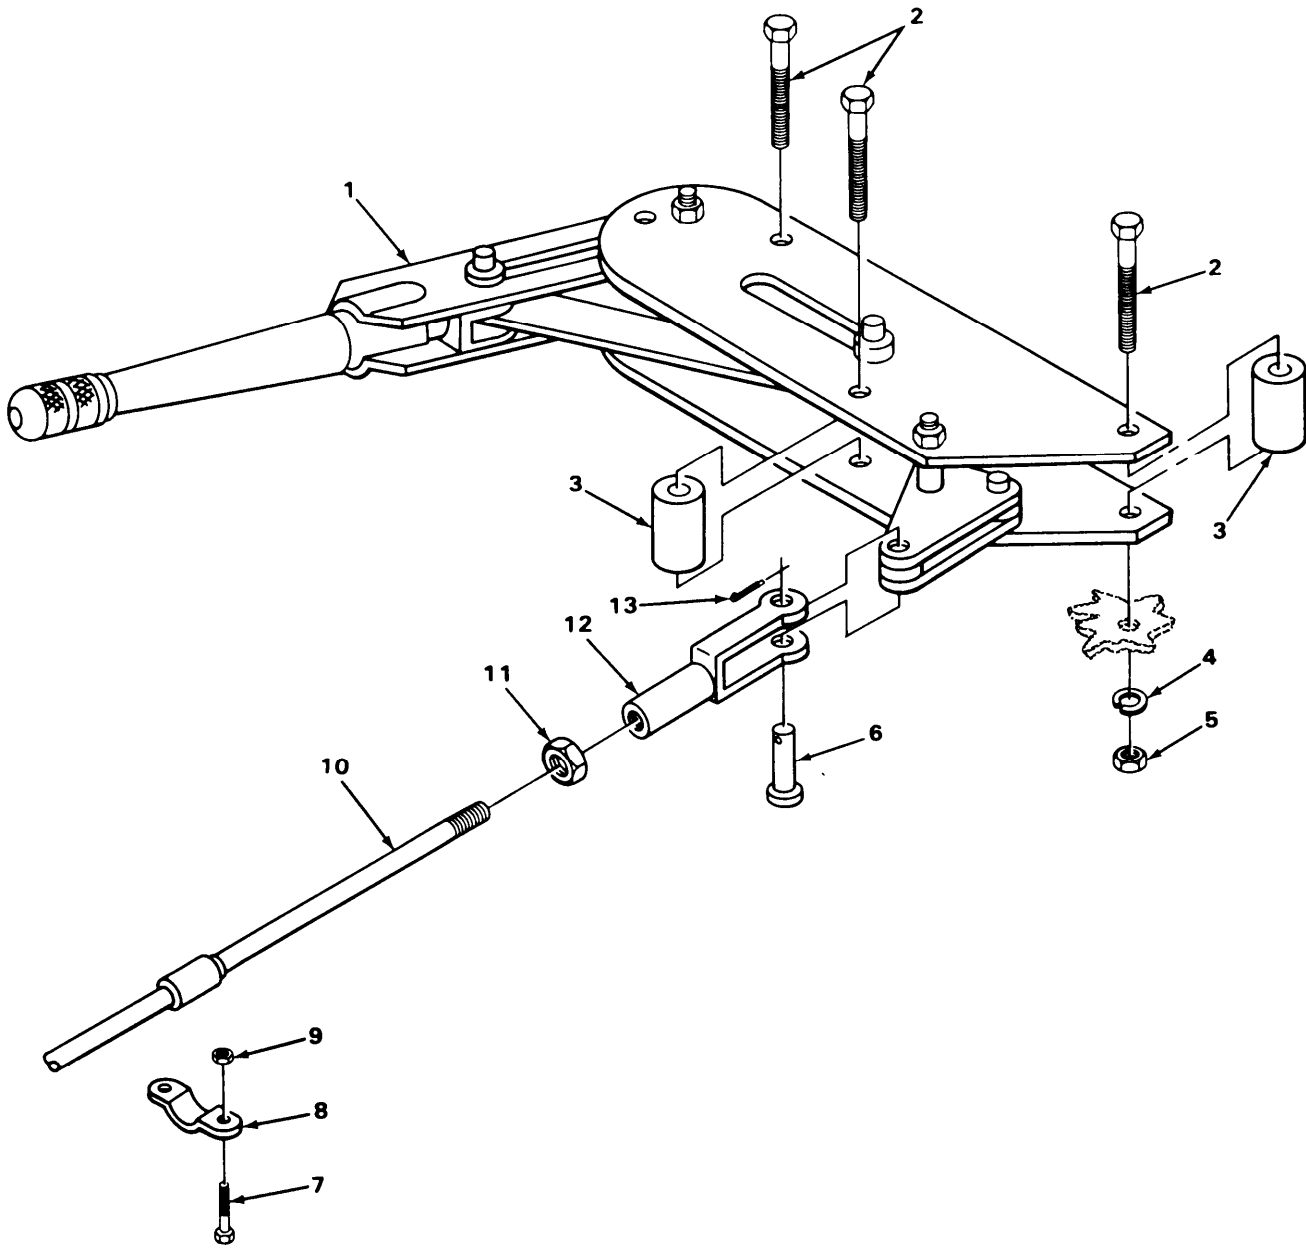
HANDBRAKE LEVER MECHANISM.
